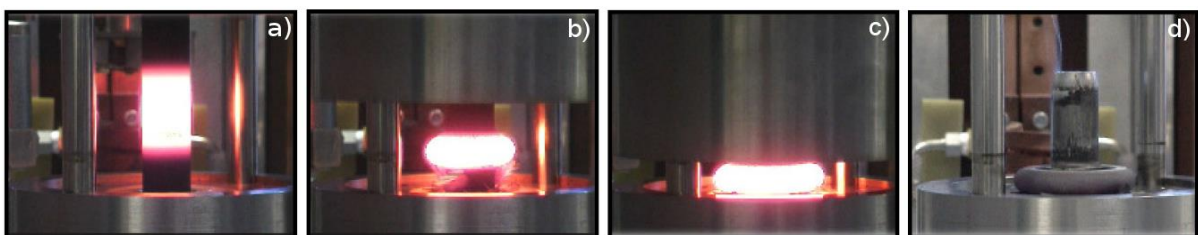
Simultaneous hot/cold forging of a shaft [2]
